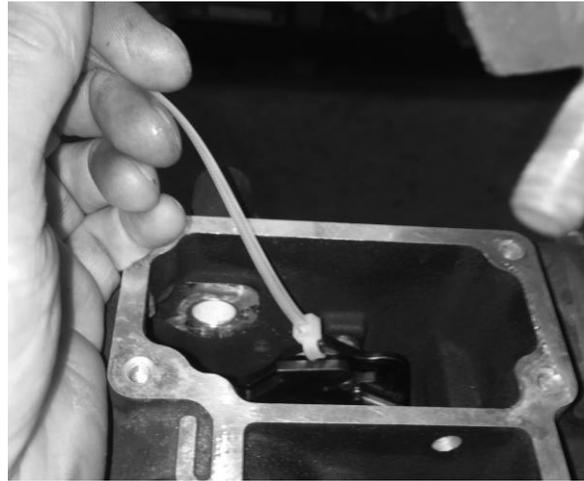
| LEAVE THE ZIP TIE ON THE SHIFTER PAWL UNTIL AFTER THE GEARSET IS INSTALLED AND THE BOLTS ARE TORQUED
